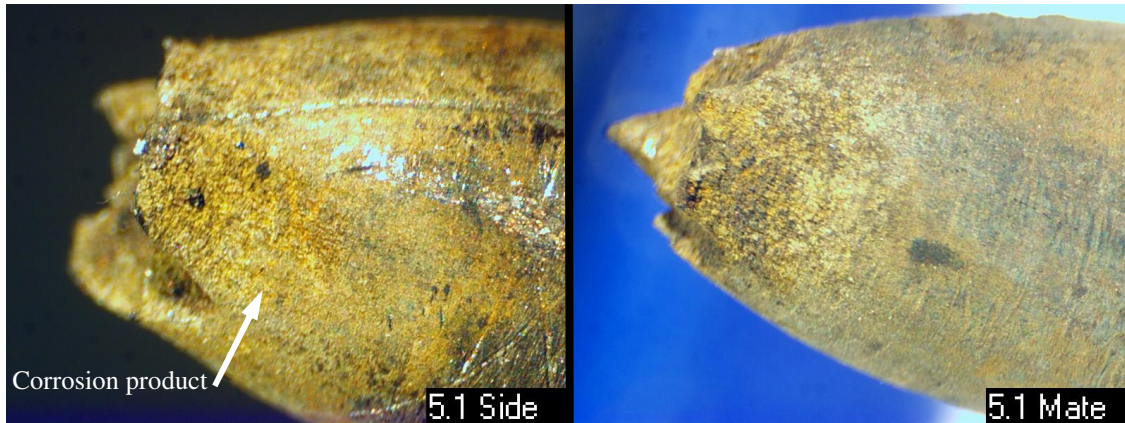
Visual inspection of test specimen 5 – side views.
